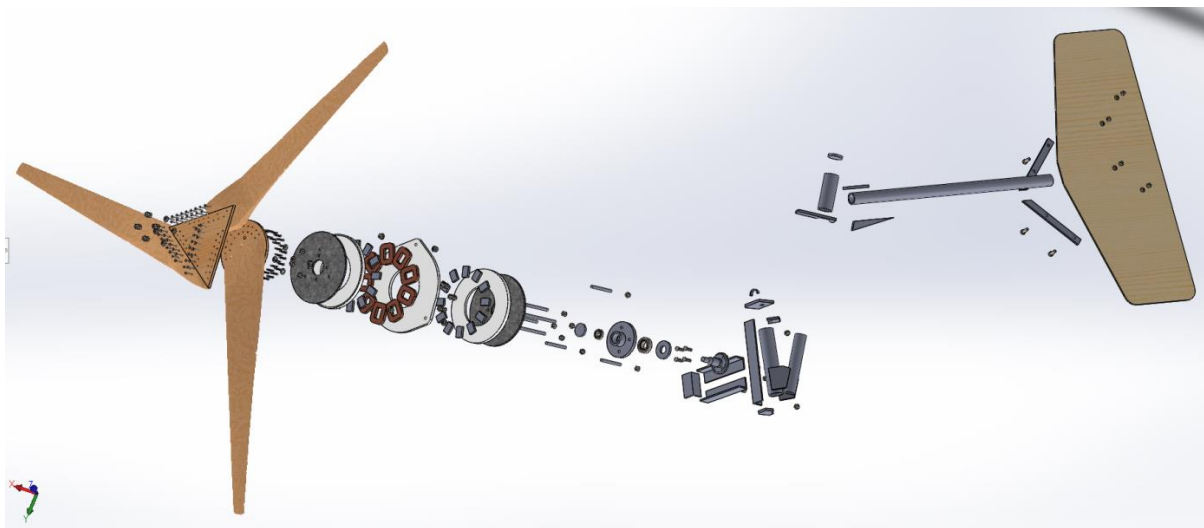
Exploded view of a Piggott 2m40 wind turbine under Solidworks
